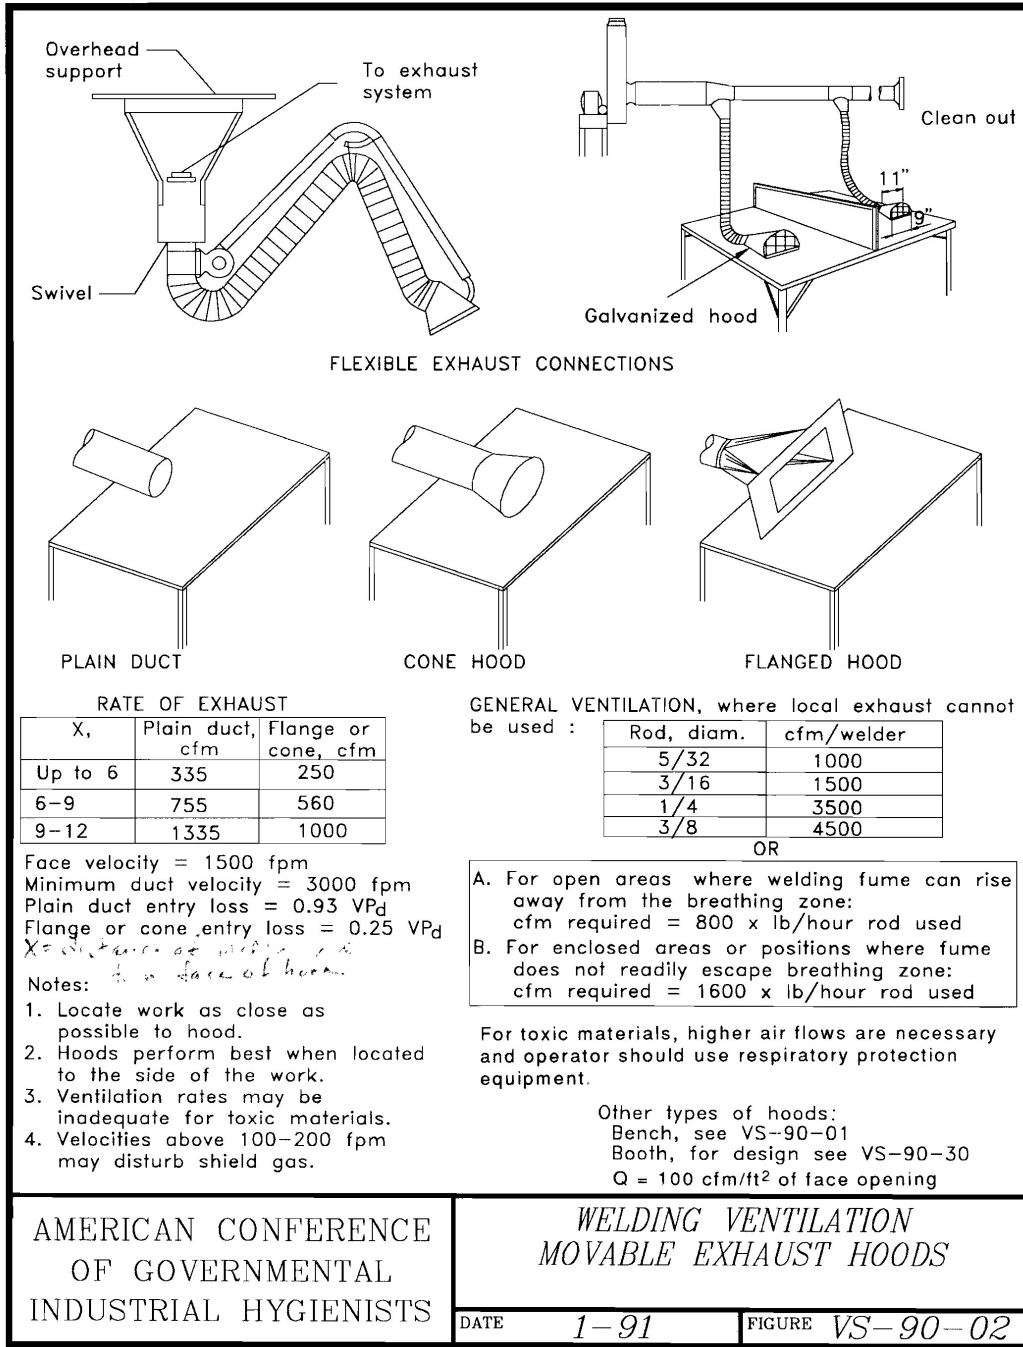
Welding ventilation movable exhaust hoods.
